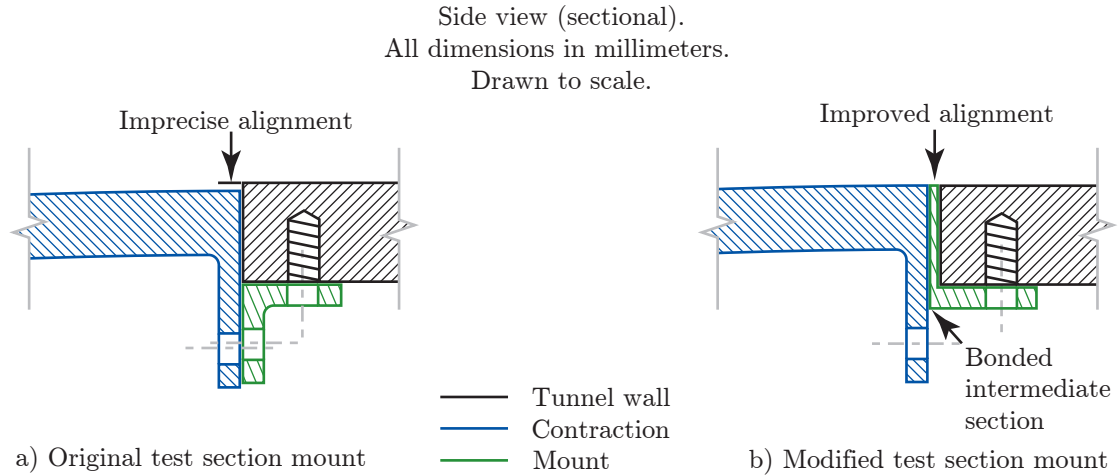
Wind tunnel test section mounting to the inlet contraction.
